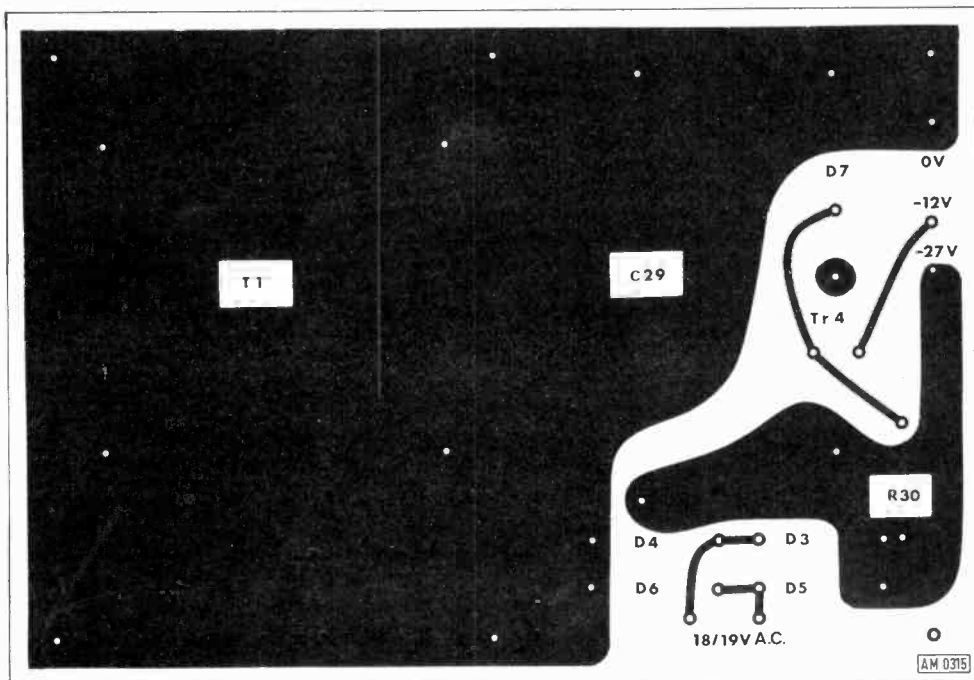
Actual size layout for the PCB on which the power supply is built.
